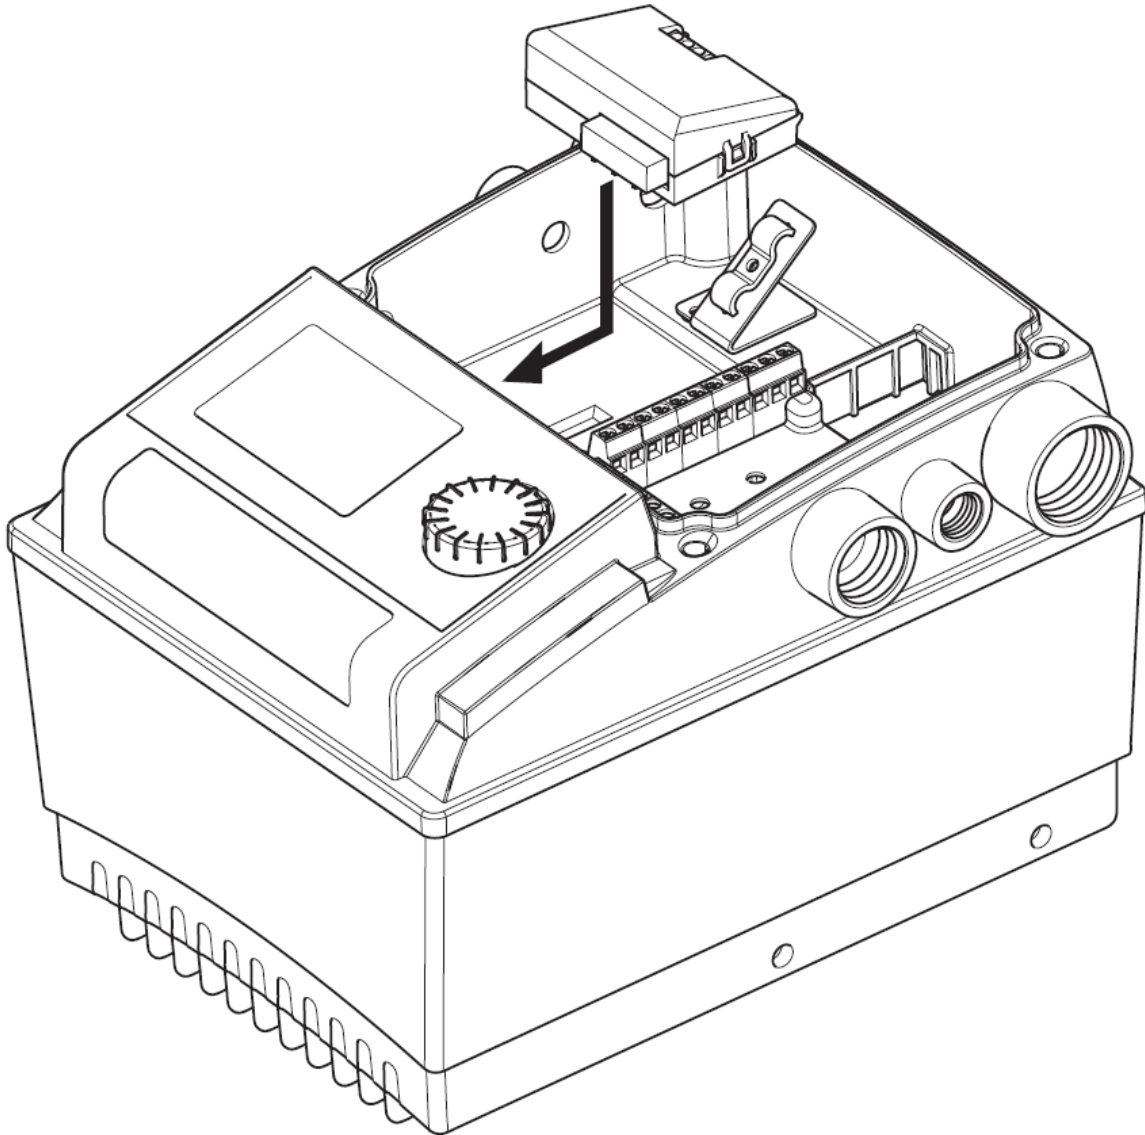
Mounting of IF-Module for pumps up to 4 kW
